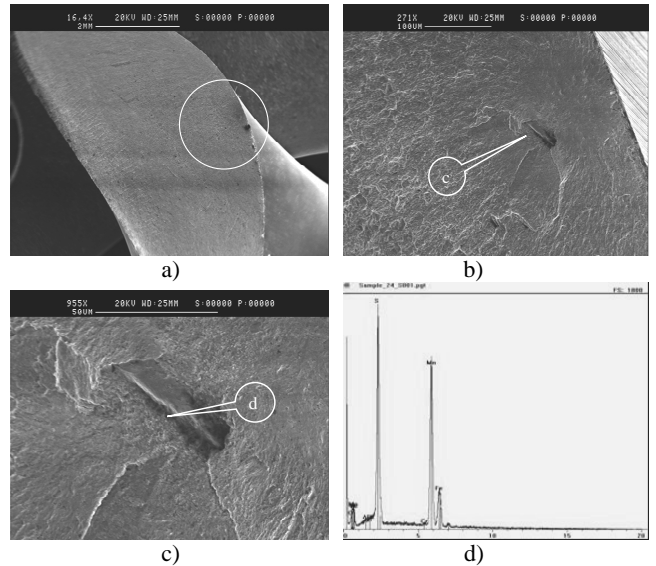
I. Fatigue crack initiation from the inside a) fatigue fracture surface; b) stable crack propagation, c) inside fatigue initiation and EDS analysis d), ($\tau_{max} = 380\text{MPa}$; $N_f = 3.5 \times 10^8$)
